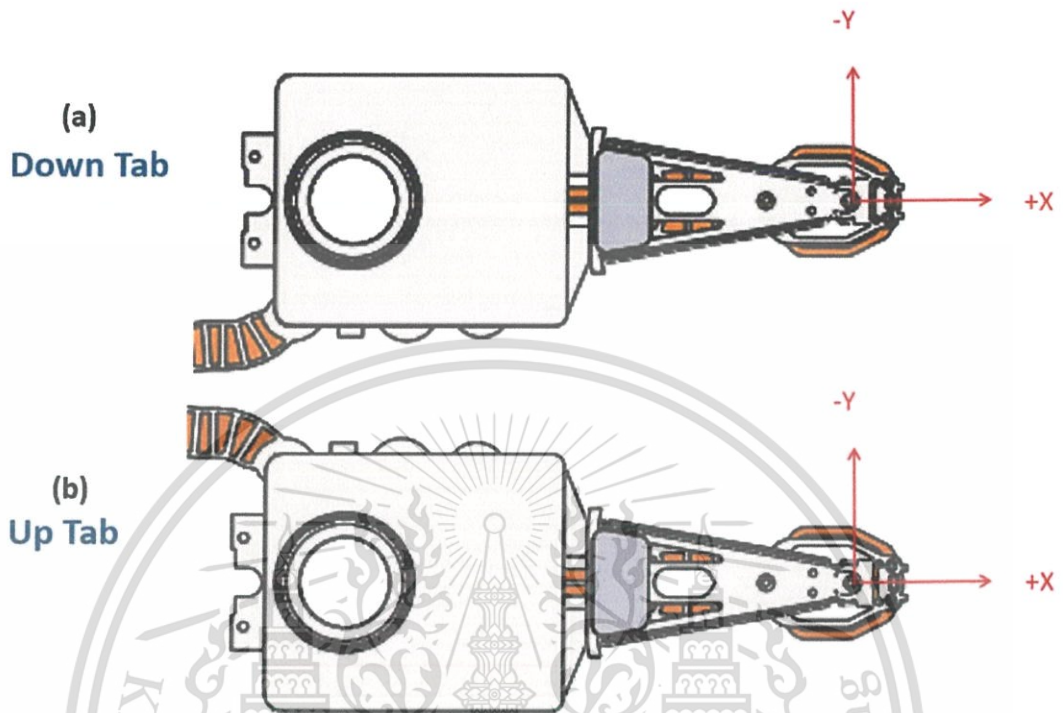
Typical Dimple Direction Definition Schematic, (a) head located under the disc (b) head located above the disk [2]
